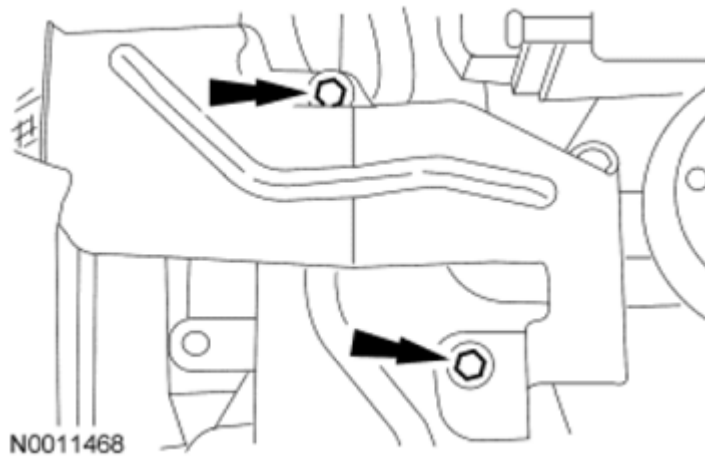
Locating Intake Manifold Shield Mounting Bolt
